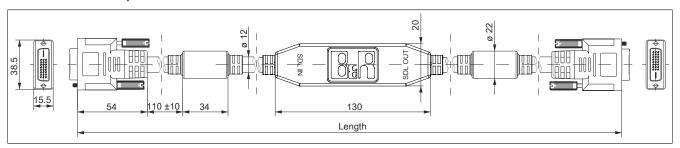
5CASDL.xxxx-13 ≥Rev. E0 - Dimensions
